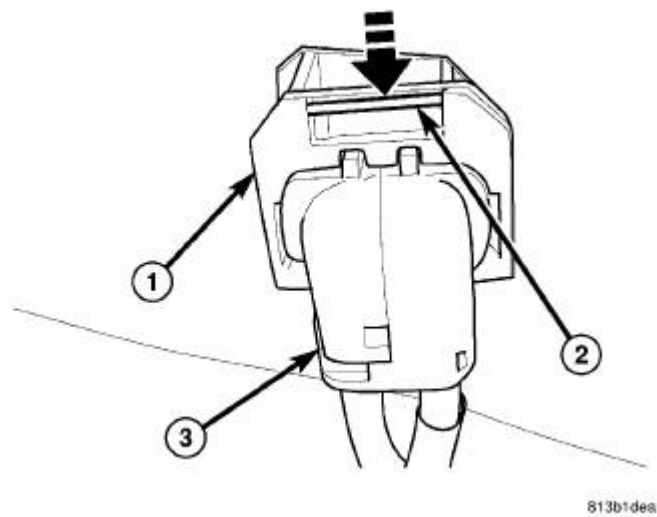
RELEASE WHEEL SPEED SENSOR CONNECTOR
